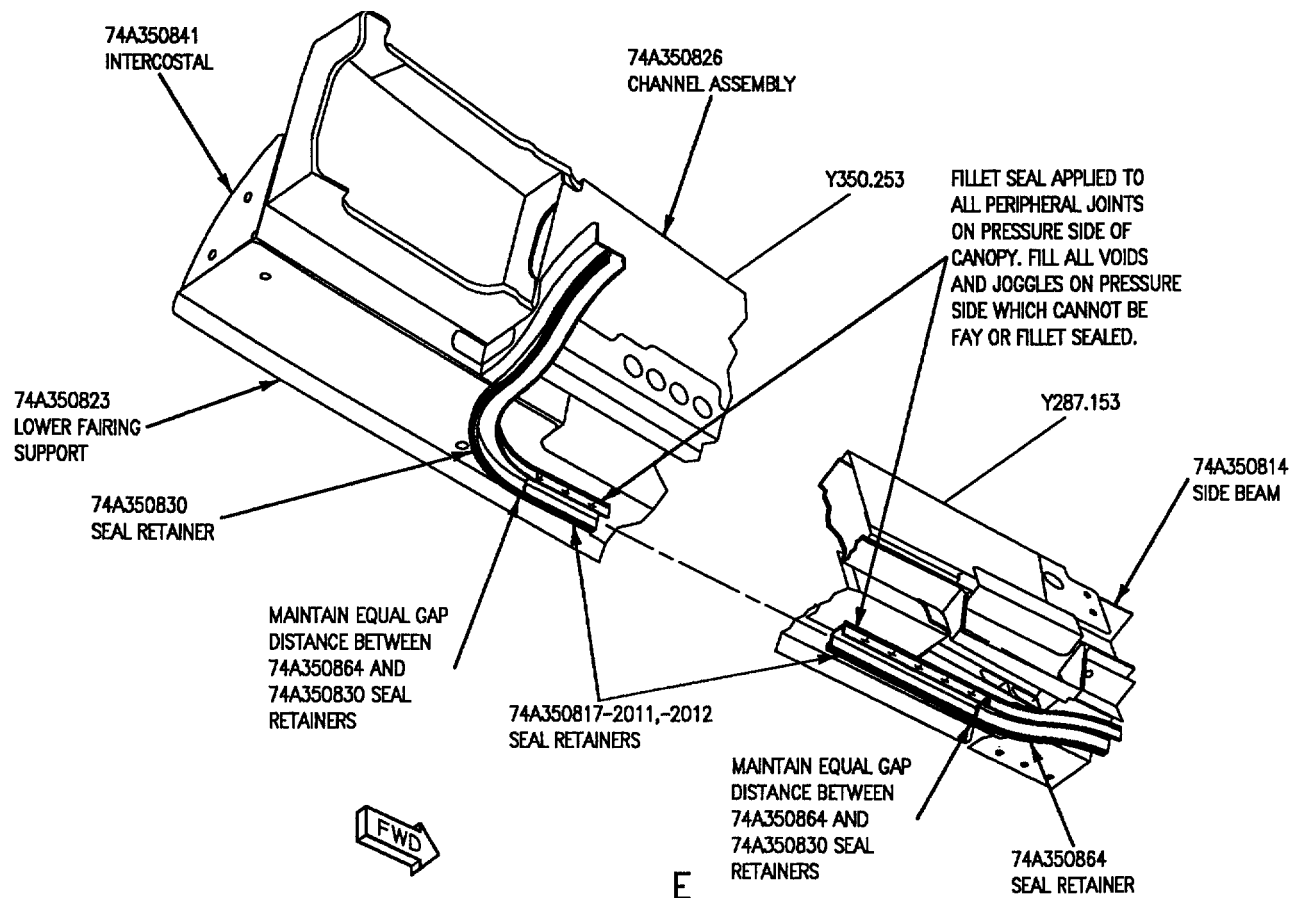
Inspection and Replacement - Seal Retainer (Sheet 2)
